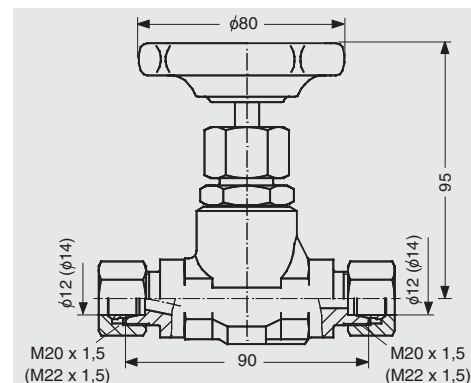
/112 Shut-off valves 7MF9017-1C, -1D, -2C, -3C, dimensions
